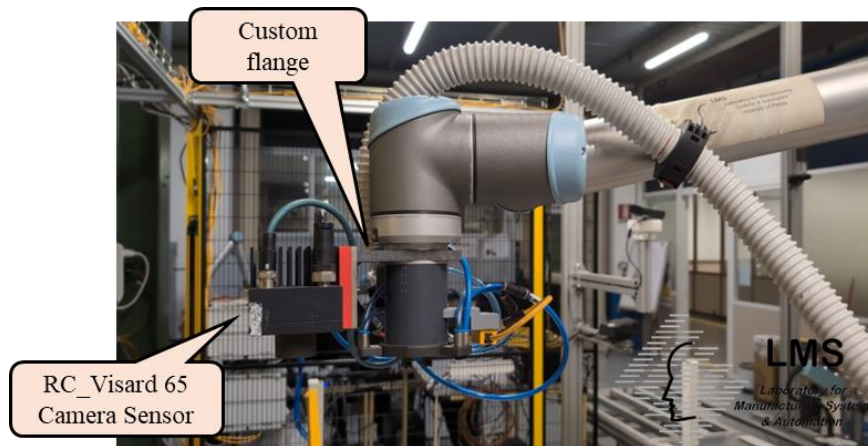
RC_Visard camera sensor installed in White Goods pilot demonstrator
